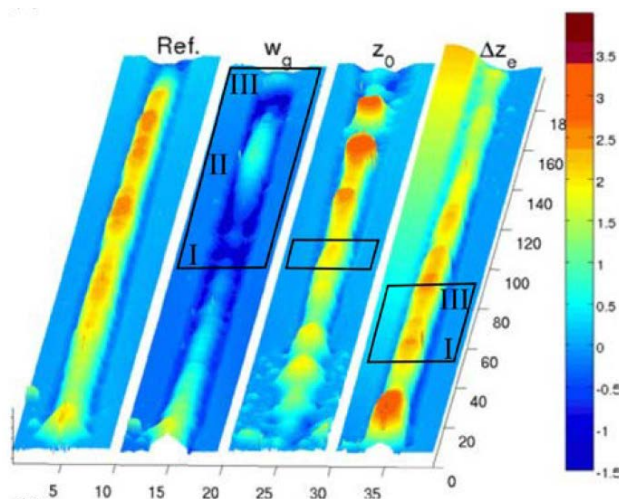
Scanned weld surfaces where geometric joint variations have been tested systematically.
